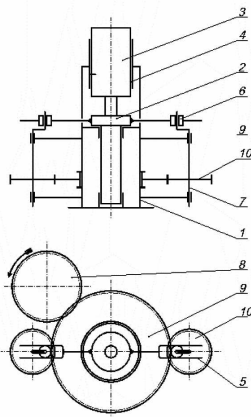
Kinematic diagram of the combined compression and oscillatory torsion test stand (1. Body, 2. Bottom punch, 3. Upper punch, 4. Non-rotational sliding bearing, 5. Yoke - arm of lower punch, 6. Roll, 7. Crankshaft (eccentric), 8. Driving sprocket, 9. Toothed ring, 10. Toothed gear)
